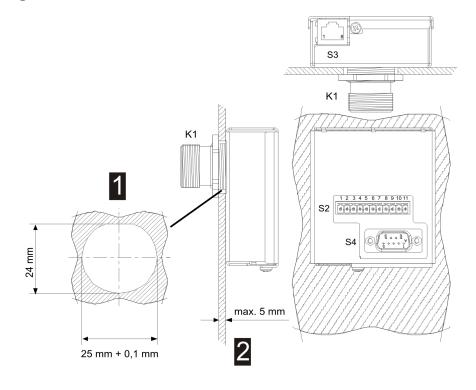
Dimension dfrawing for the mounting opening of the JB 001
